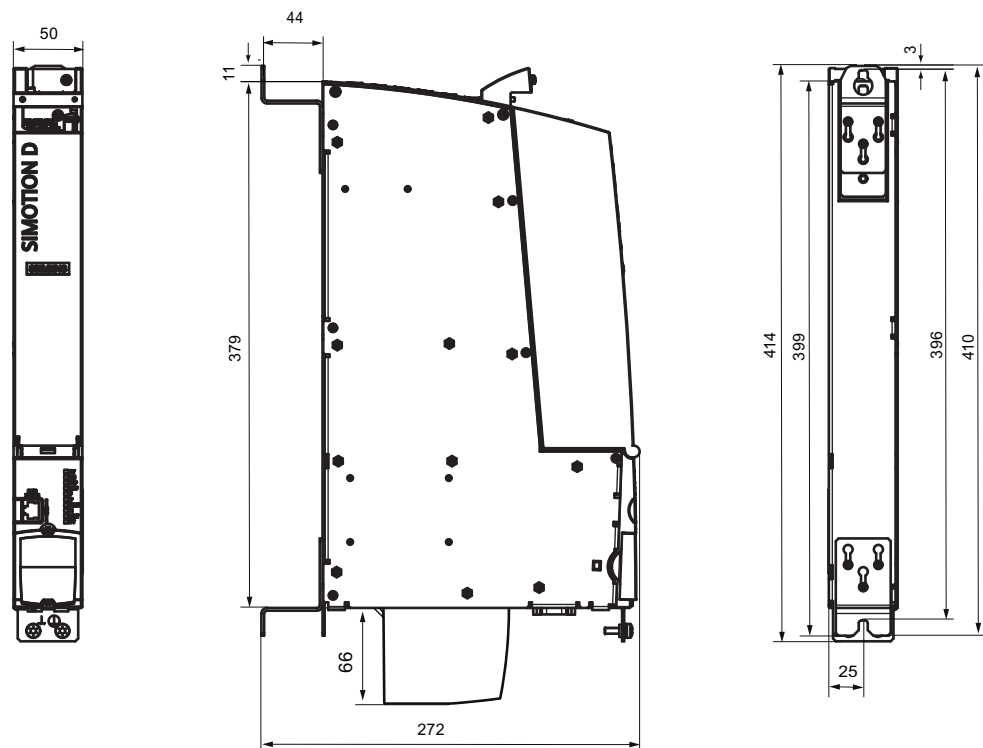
D425-2 and D435-2 dimension drawing (dimensions in mm)
